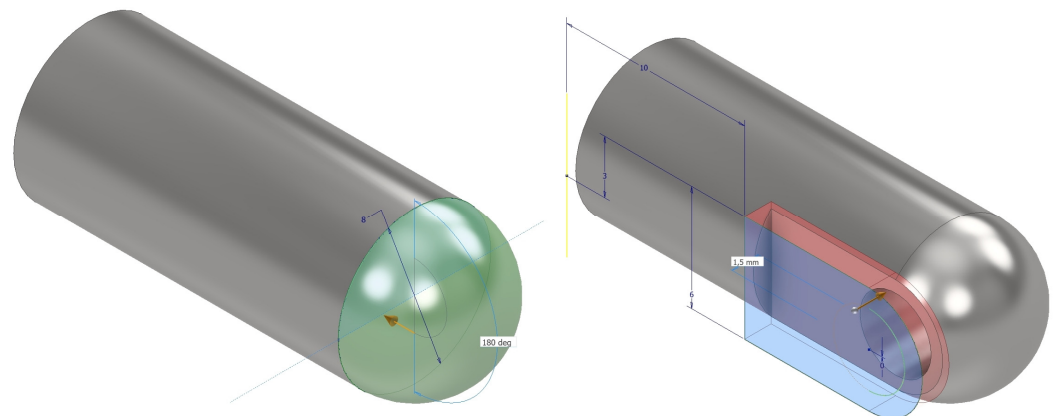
First subassembly: front view (left) and rear view (right).
